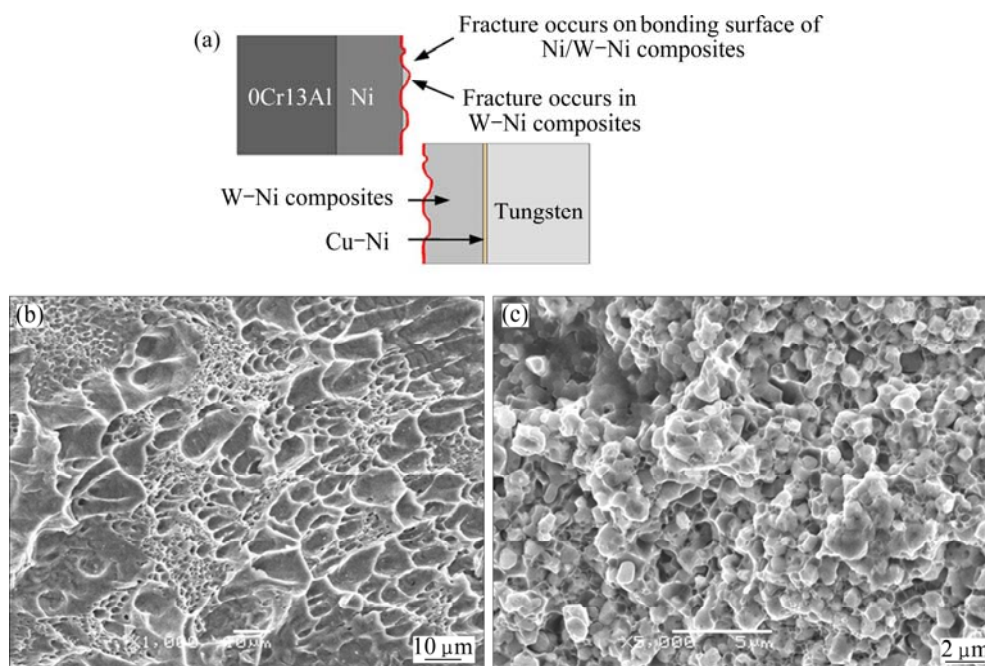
Fractographs of joint (steel side): (a) Schematic diagram of fracture path; (b) Fracture surface of Ni/W–Ni composites joint surface; (c) Fracture surface of W–Ni composites
